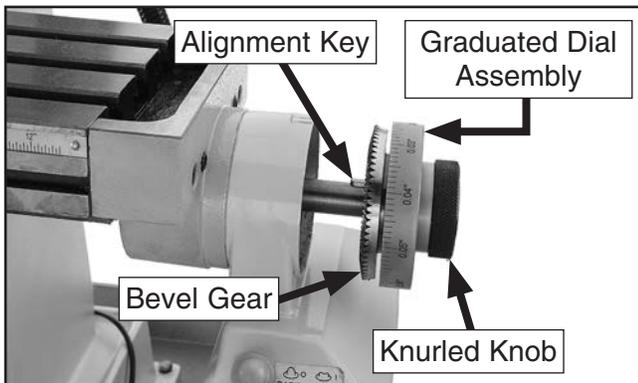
X-axis leadscrew with cap screw, fender washer, and handwheel removed.
